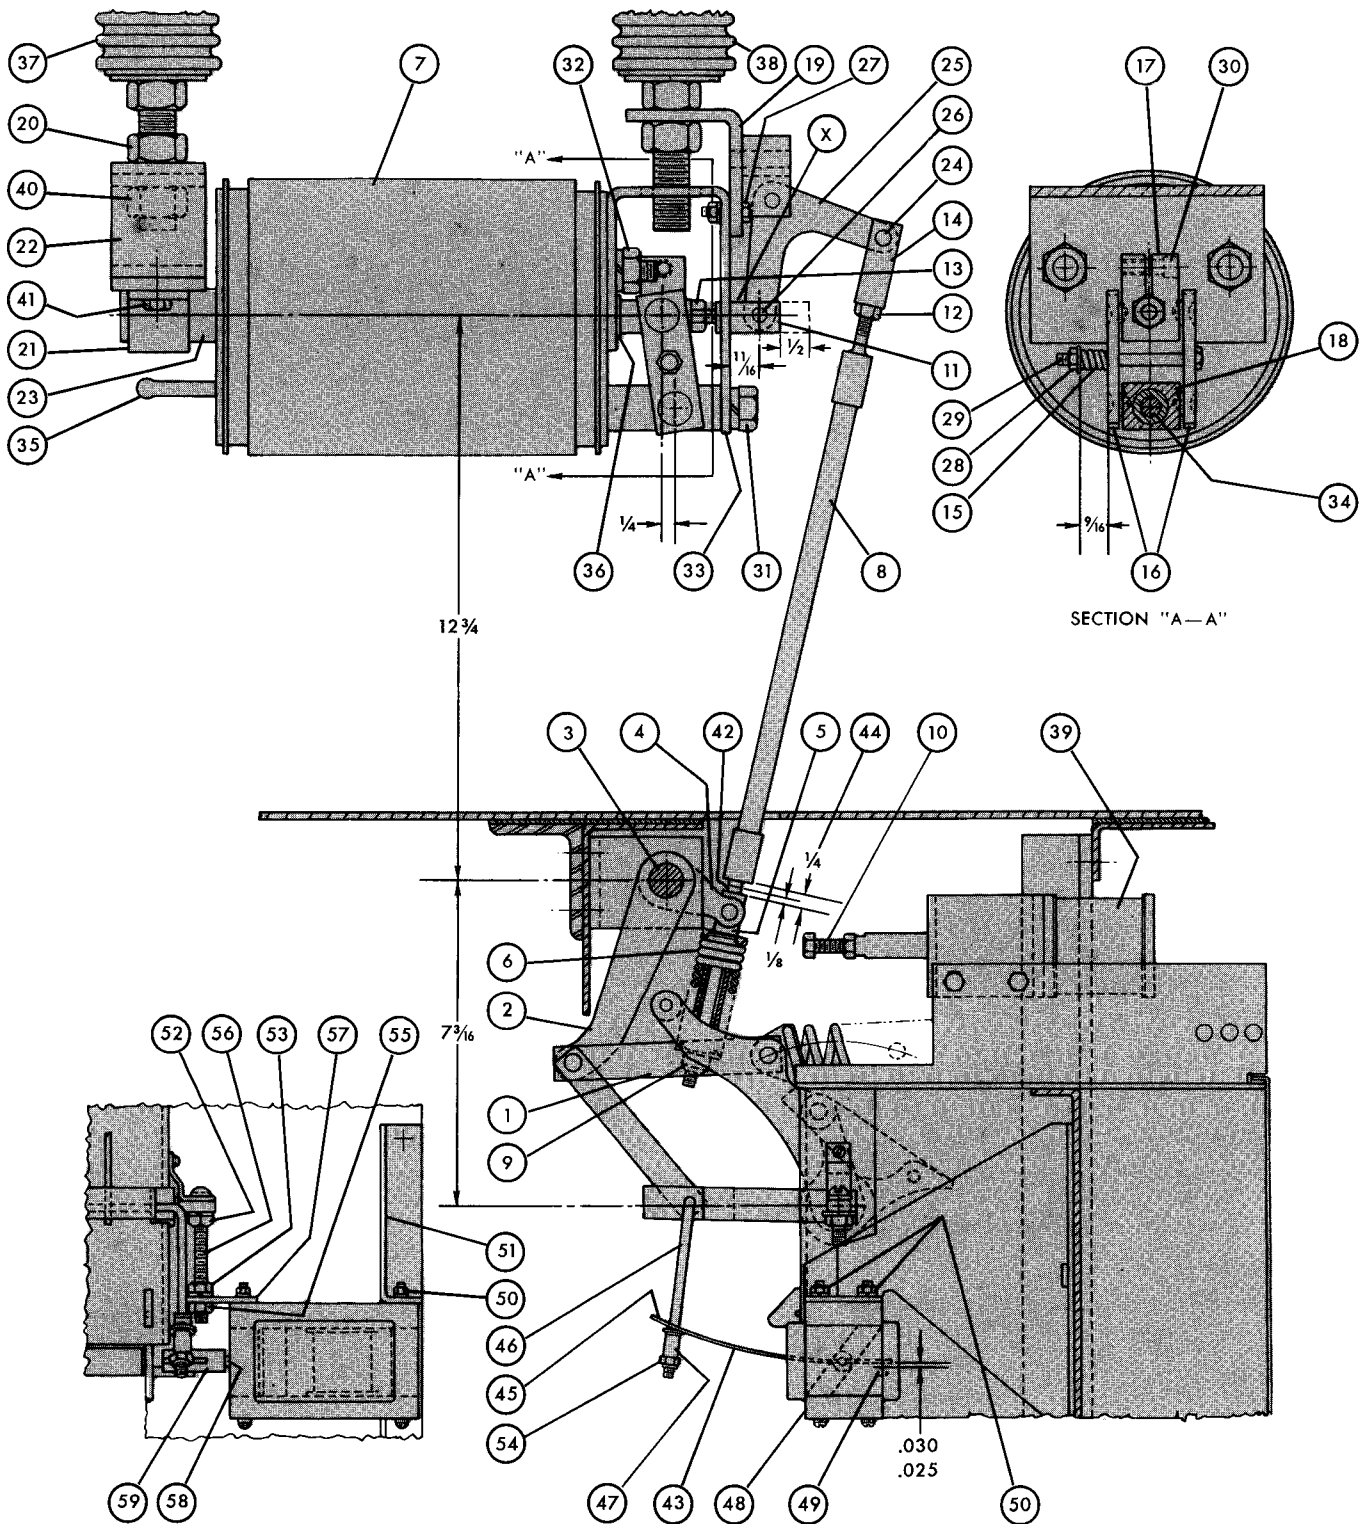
Vacuum Interrupter and Mechanical Linkage.
